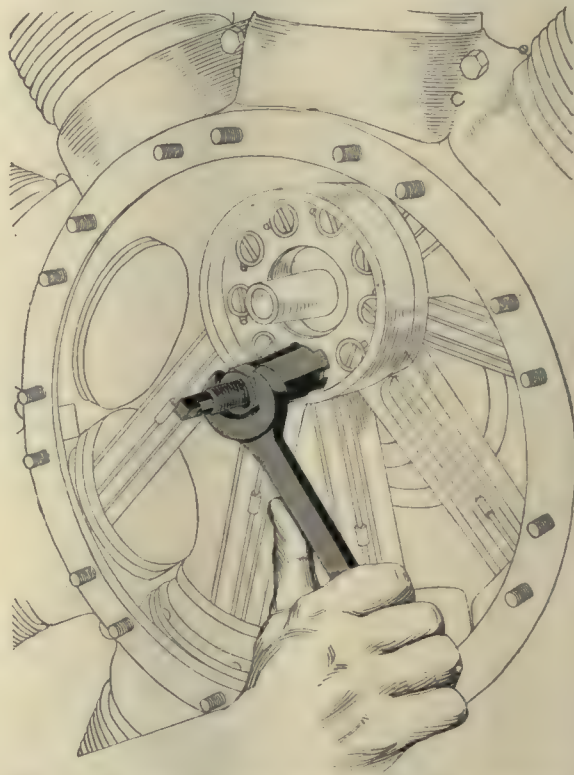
WITHDRAWING WRISTPINS AND SCREWS
